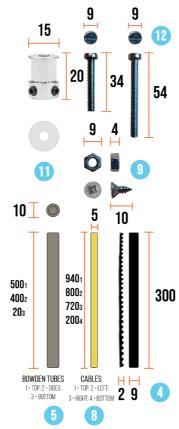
Main outer dimensions of purchased parts (in [mm]).
